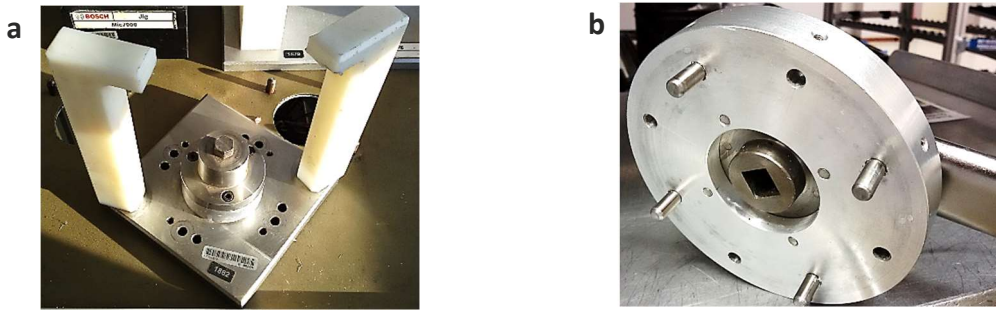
a) Fixture to mount Pan assy stage 1; b) Special tool to tight Pan base.
